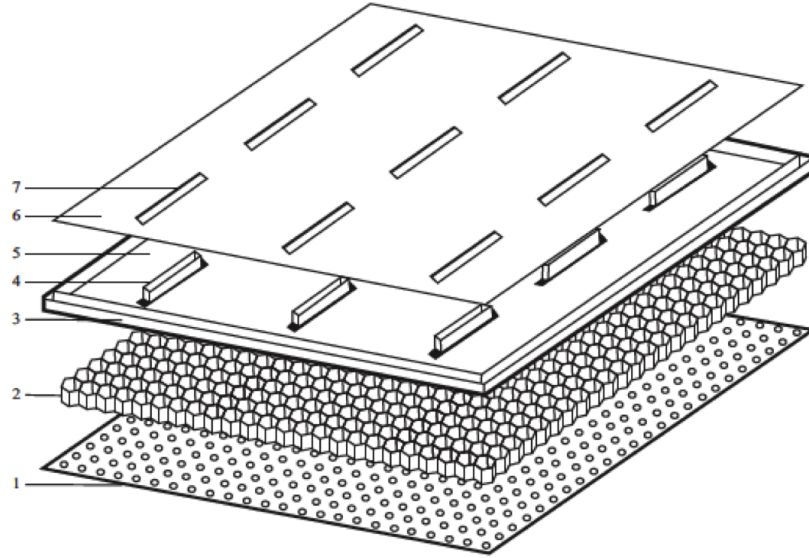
A schematic view of components of a unit module: (1) bottom PCB, (2) honeycomb cathode, (3) moulded frame, (4) SAMTEC connectors, (5) top PCB, (6) shielding PCB with (7) slot for connector [72].
